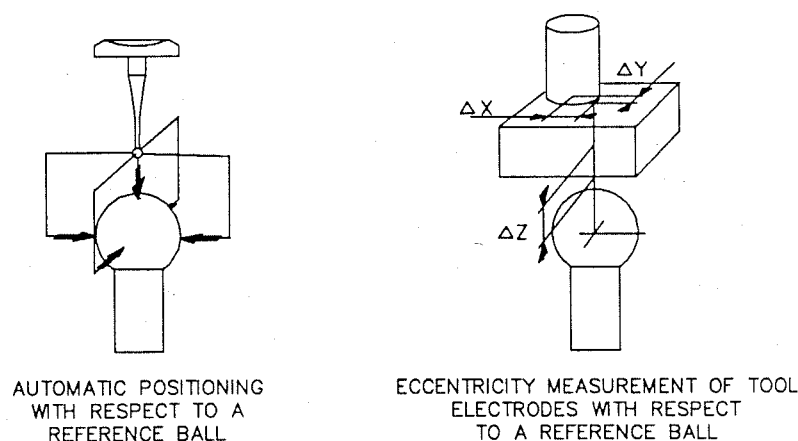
Measuring cycles for tool-electrodes on die sinking Roboform machines.
